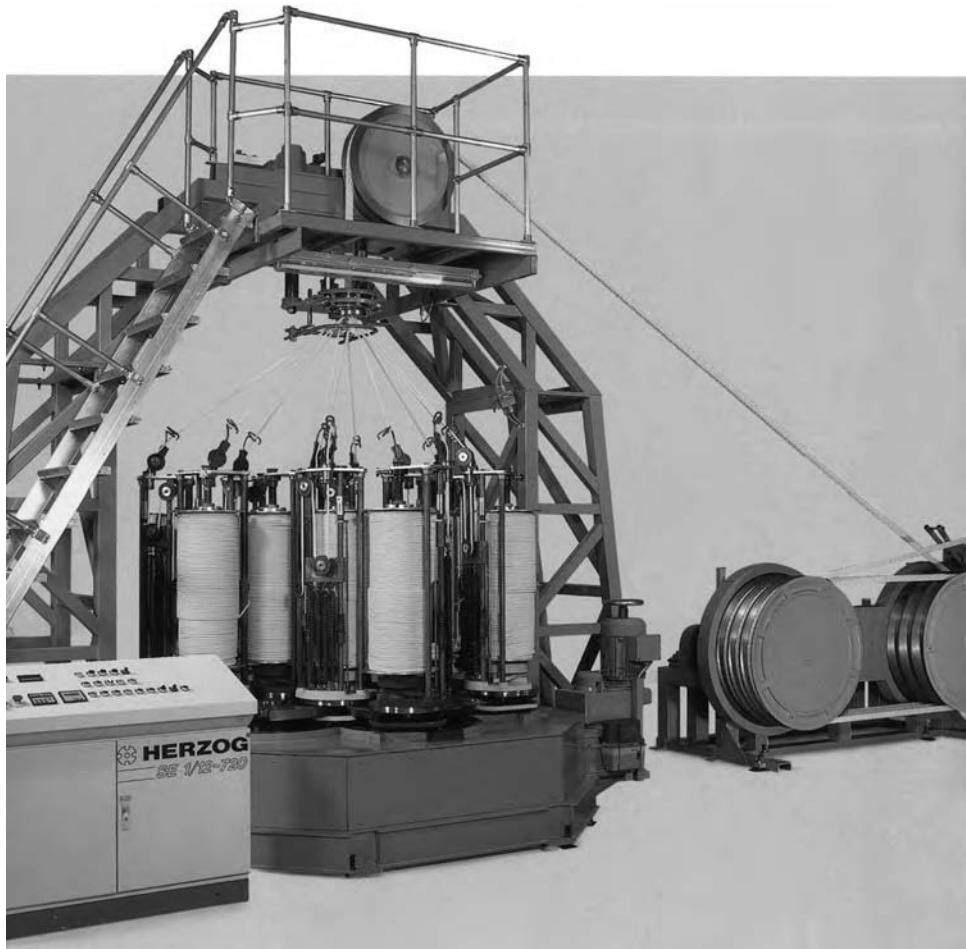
A large braiding machine for 12-strand rope. Reproduced by courtesy of Herzog.
